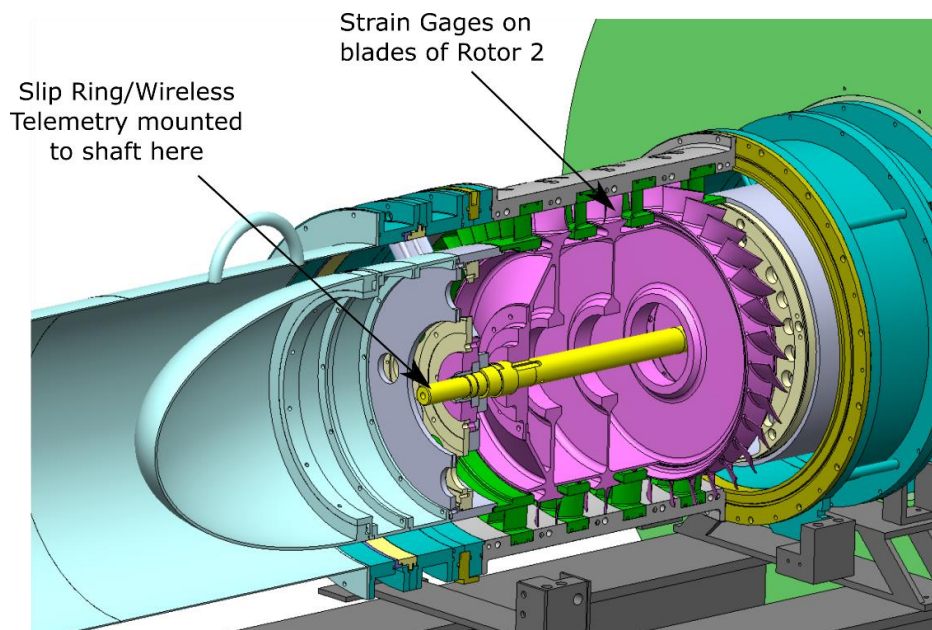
Cut-Away View of Nose Cone and Rotor Drum Cavities
